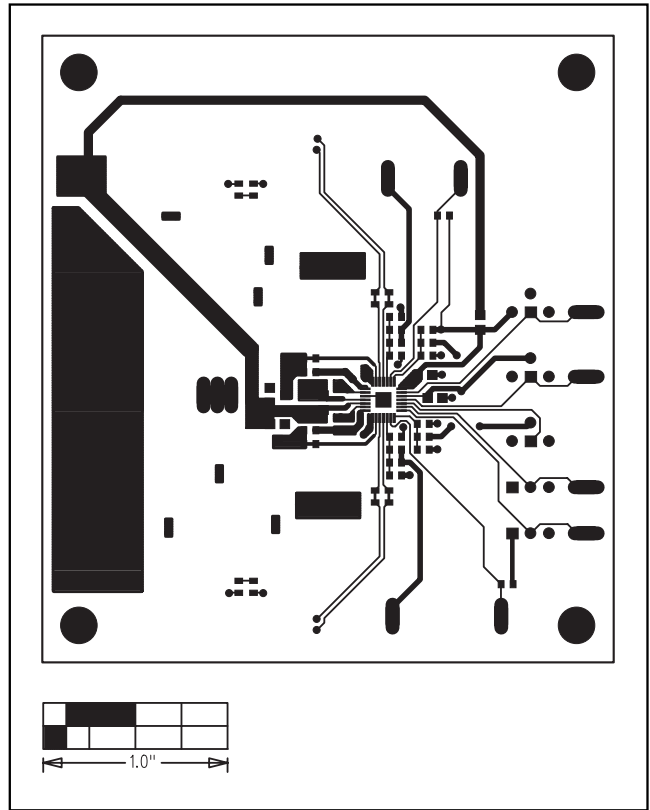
MAX8717 EV Kit PC Board Layout—Solder Side
